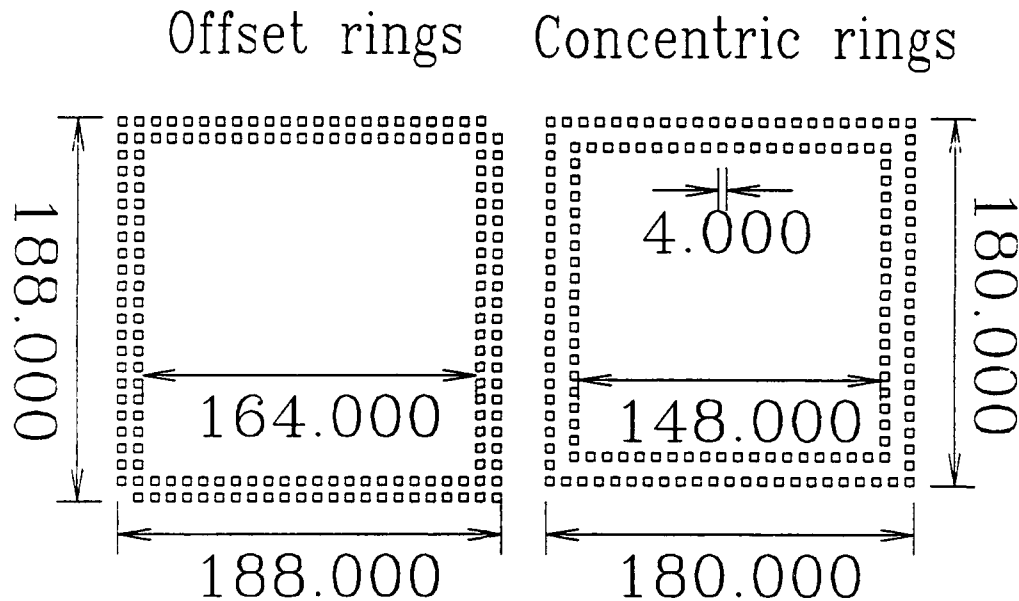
Test chip layout illustrating use of concentric rings of bond pads.
